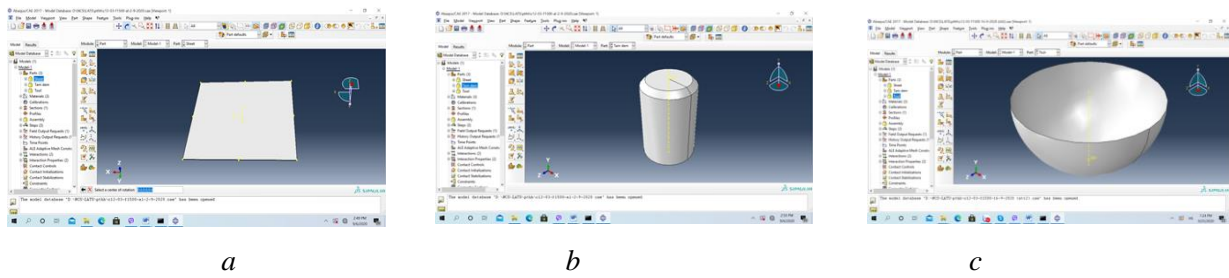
a. Sheet material; b. Support; c. The end of forming tool
